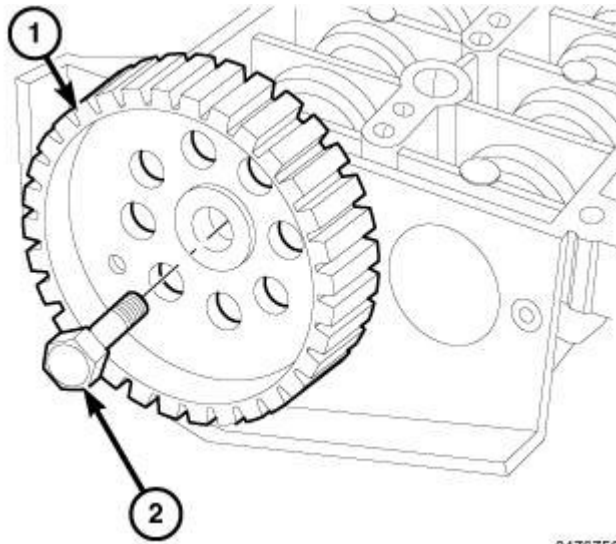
Camshaft Oil Seal, Fitting Tool & Bolt
